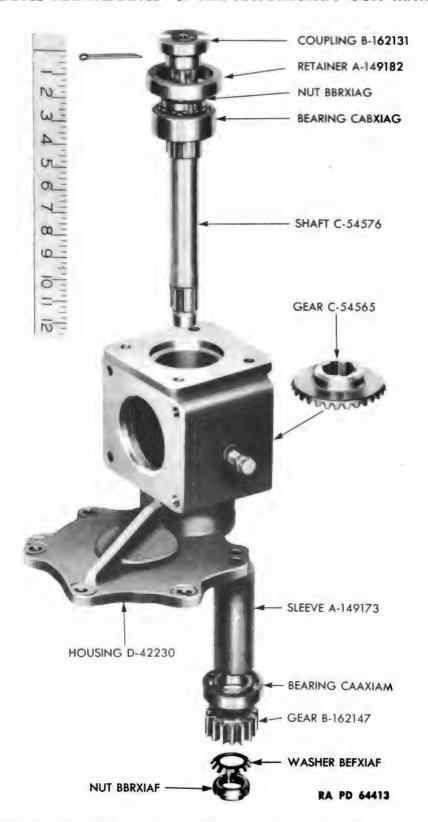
Lower Traversing Mechanism Gear Shaft Assembly— Exploded View
